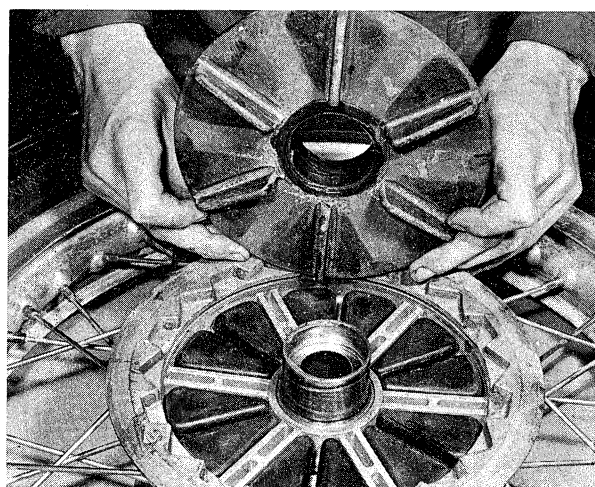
Rear wheel and cush drive - Except 750S and 850T
